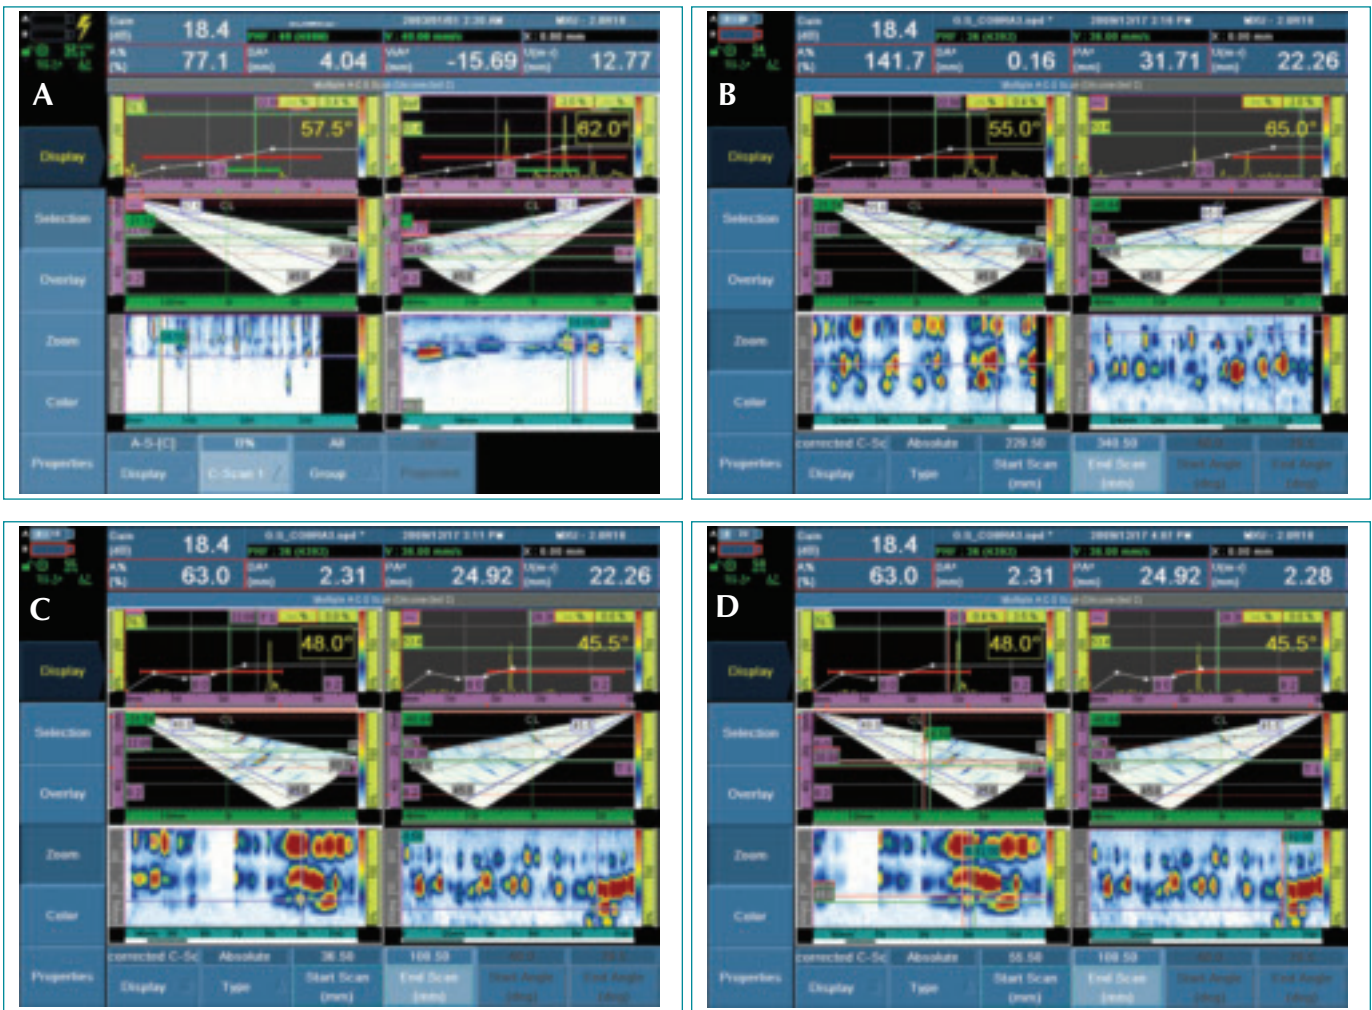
A–D — A weld 115 mm in diameter and 12.7 mm thick scanned using a variety of setup parameters.
